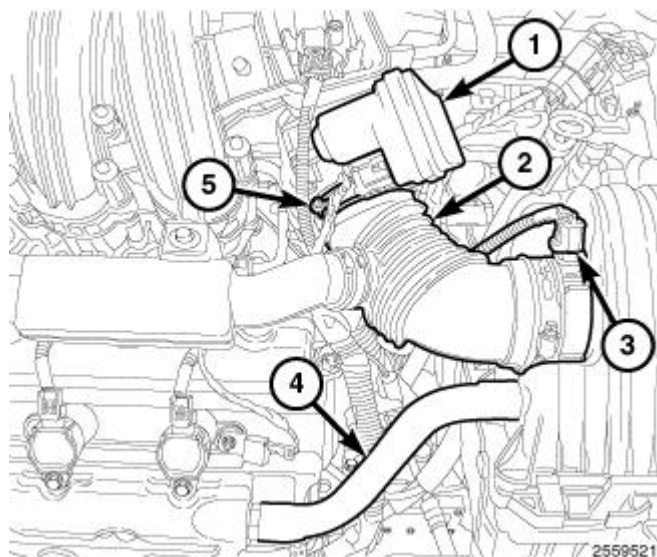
Identifying Air Makeup Hose, Throttle Body & Air Inlet Hose
